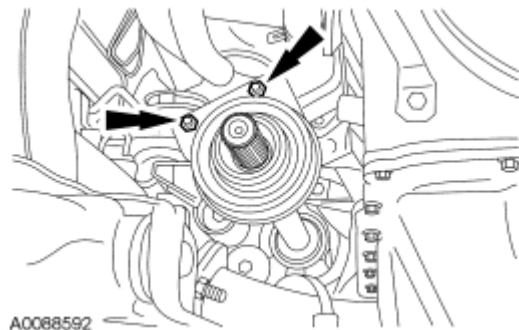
Locating Intermediate Shaft Retaining Nuts
